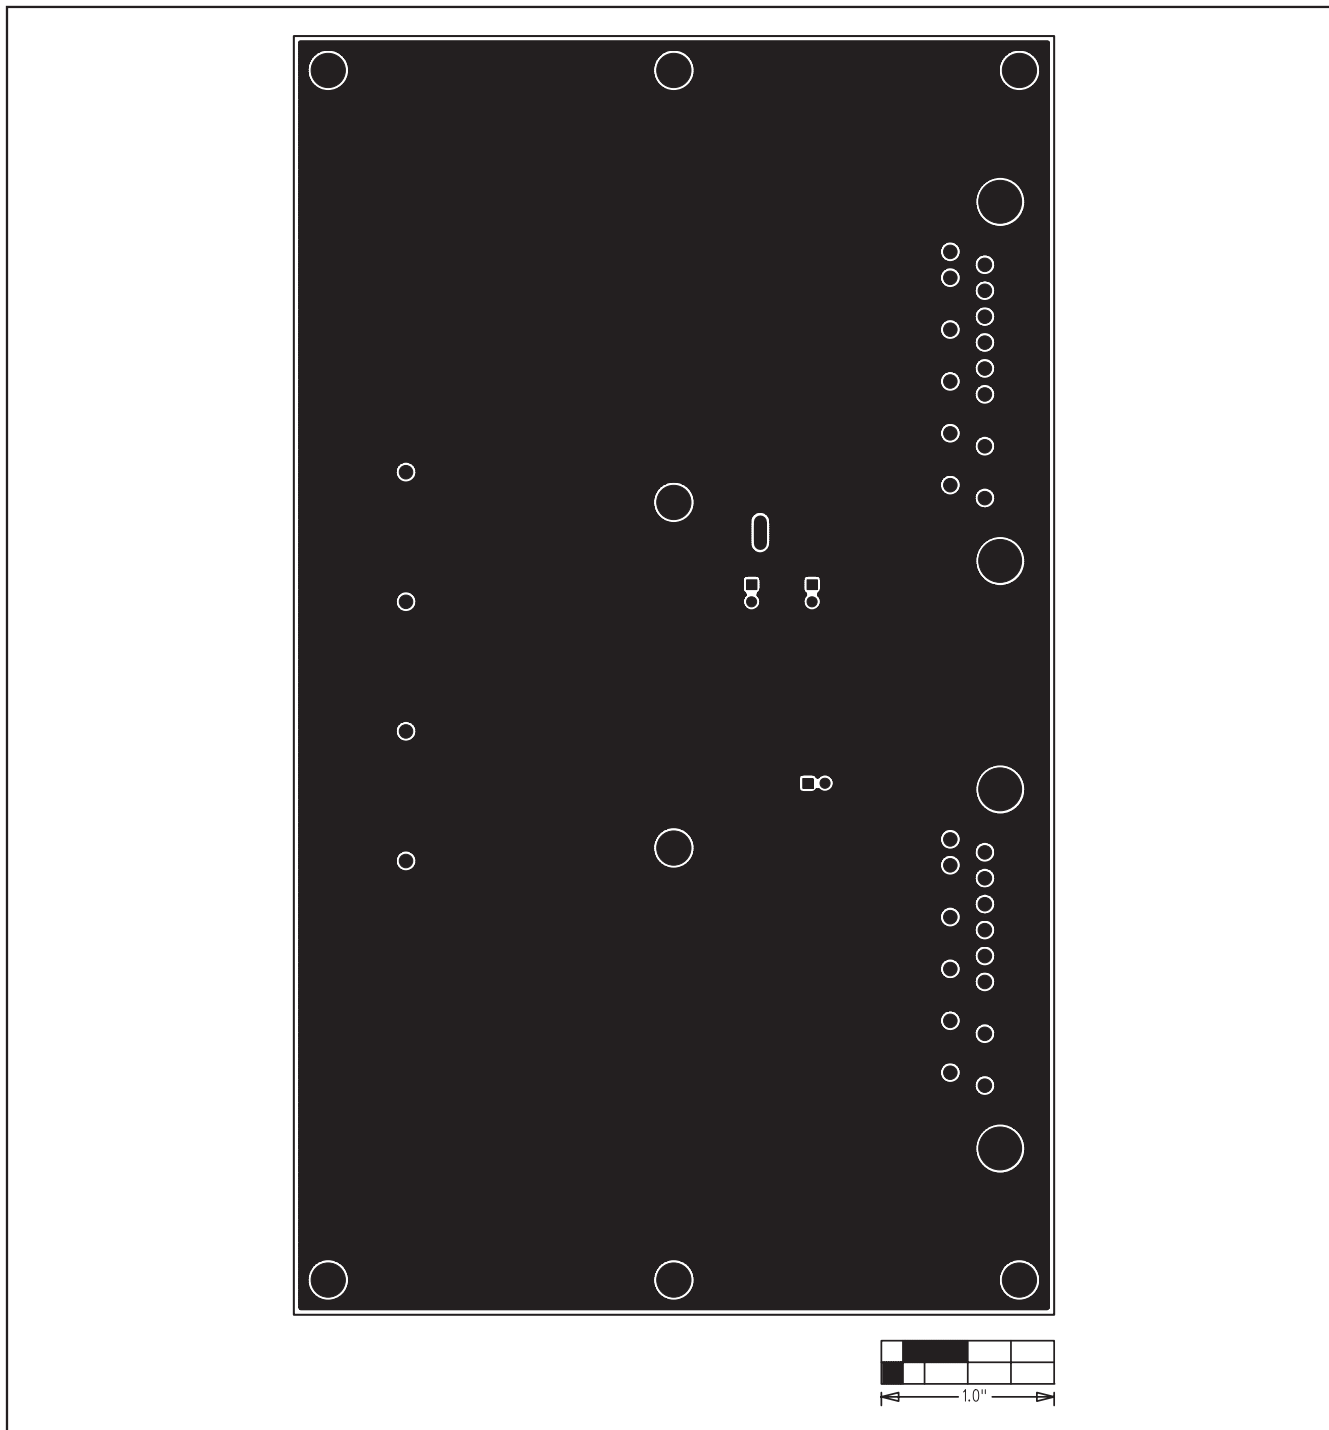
MAX9656 EV Kit PCB Layout—Solder Side
